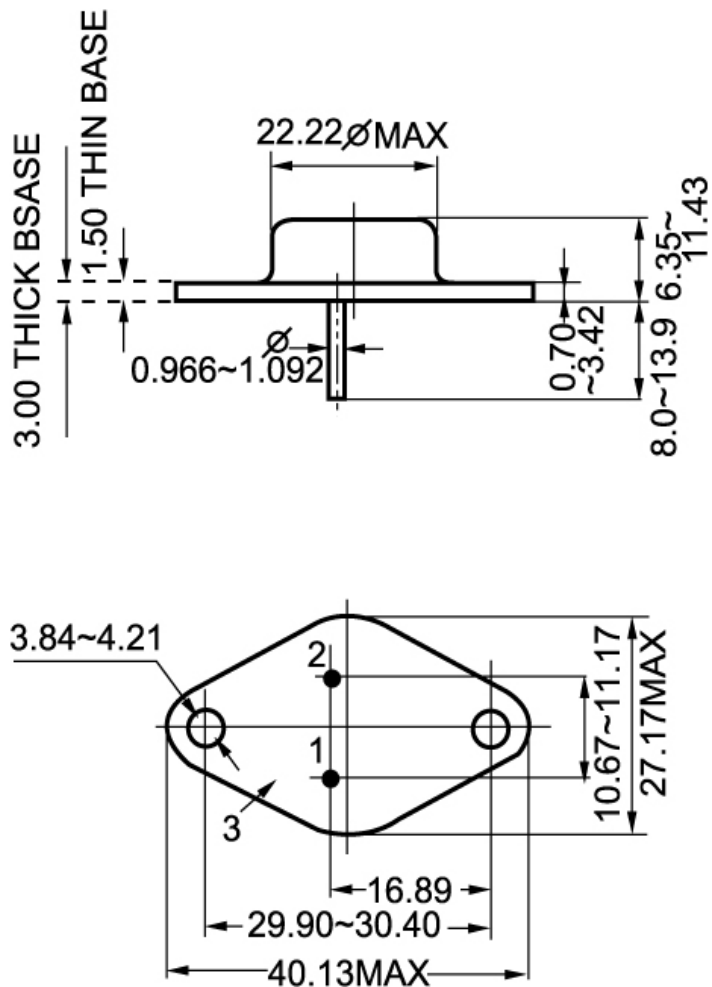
outline dimensions (unindicated tolerance: $\pm 0.1\text{mm}$)
